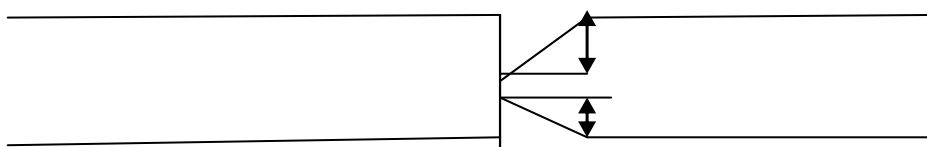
GROOVE Butt joint-PJP- PARTIAL JOINT PENTRATION
